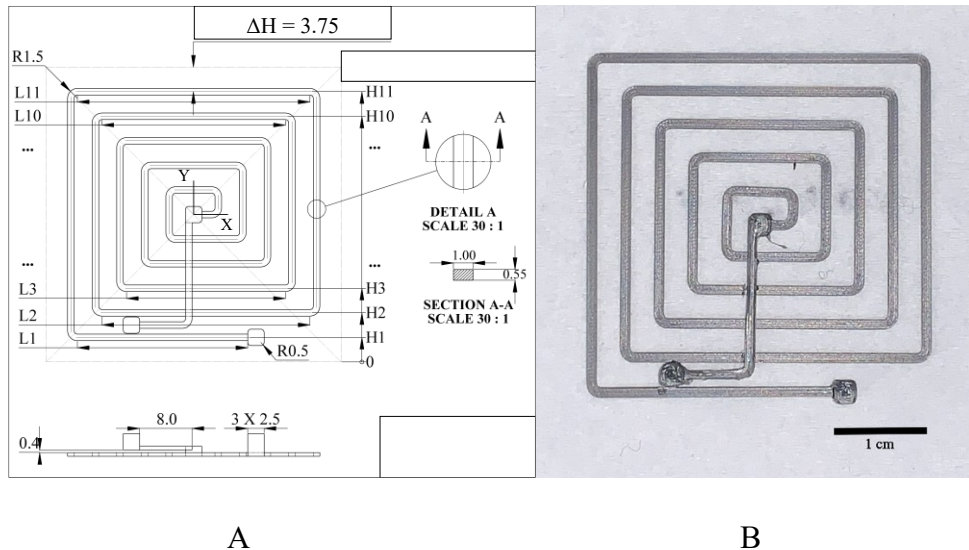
A. CAD schematic illustrating important aspects of channel design and the B. FDM 3D-printed part in ABS. All dimensions annotated in the schematic are in mm.
